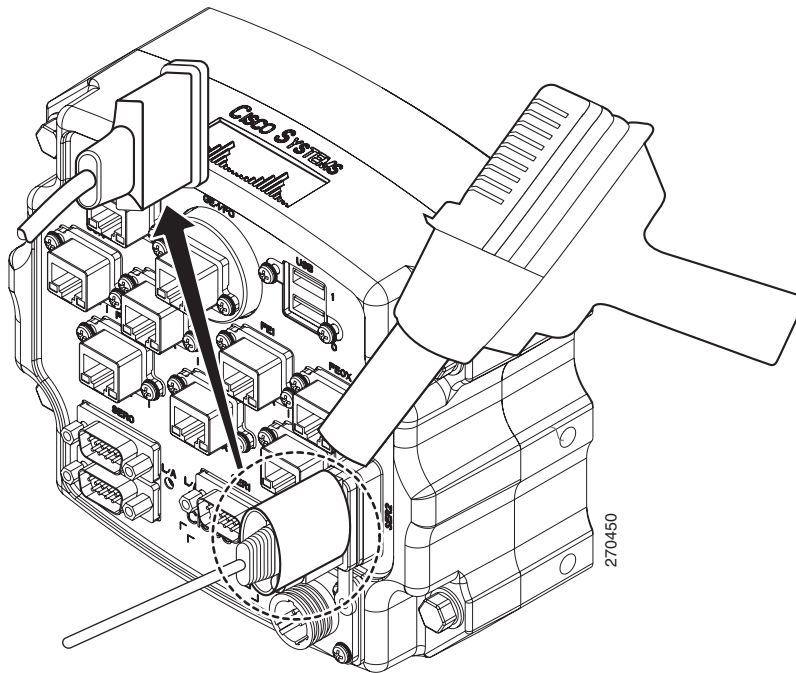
Positioning the Heat-Shrink Tubing Over the Cable Molding
